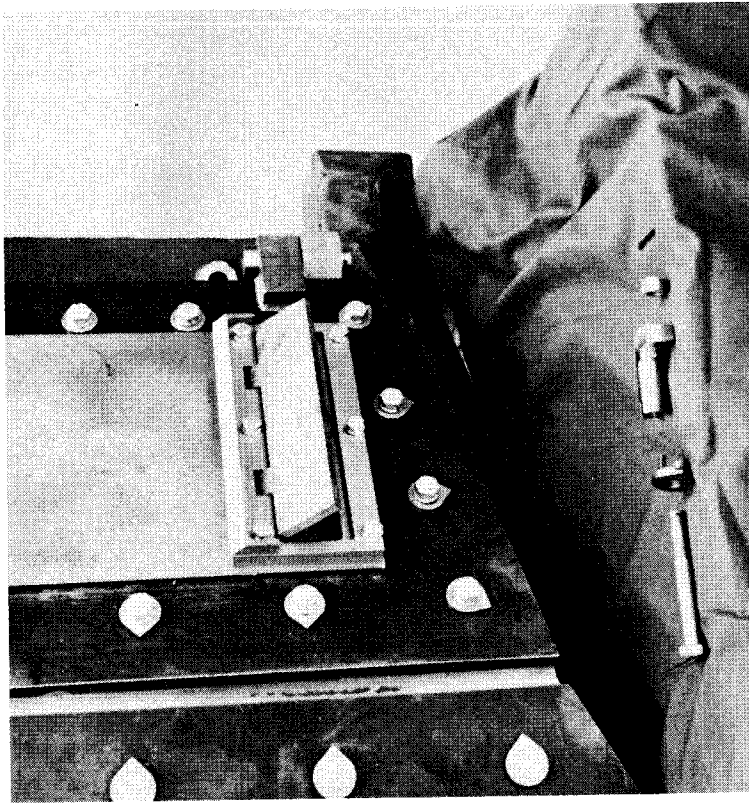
The internal rotary keeper for quick access cover fastening.
